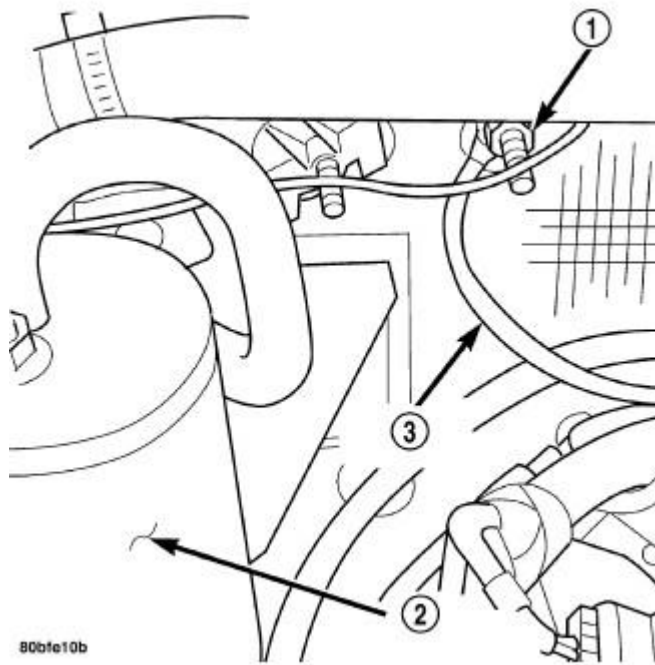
Removal/Installation Body Ground Strap-Right Side
